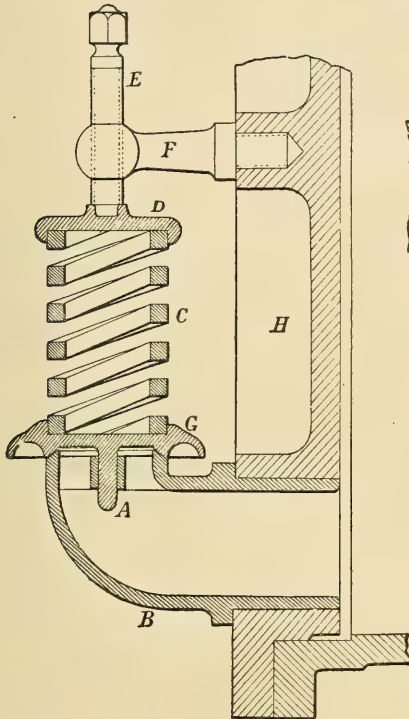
Relief Valve with Stud on Cylinder Cover.
